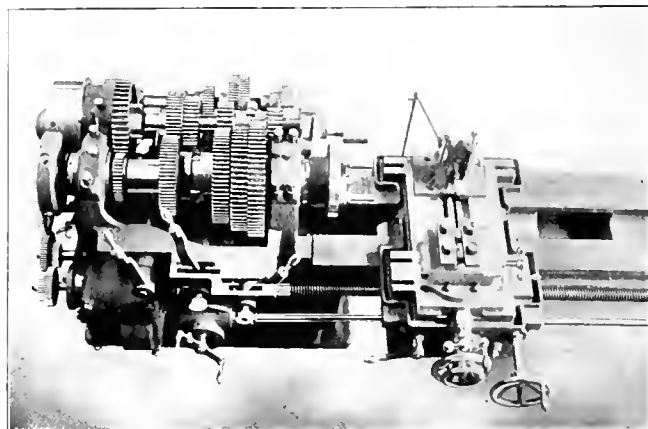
The Head-stock and Carriage of Lathe shown in Fig. 3.
